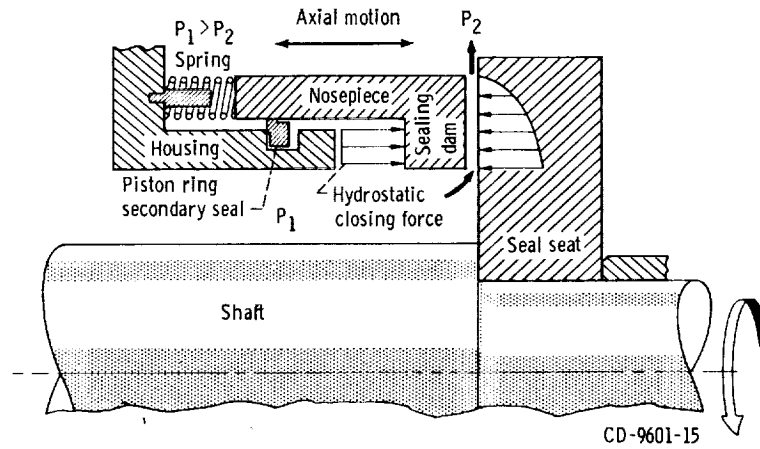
Pressure-balanced face seal with no axial film stiffness.
